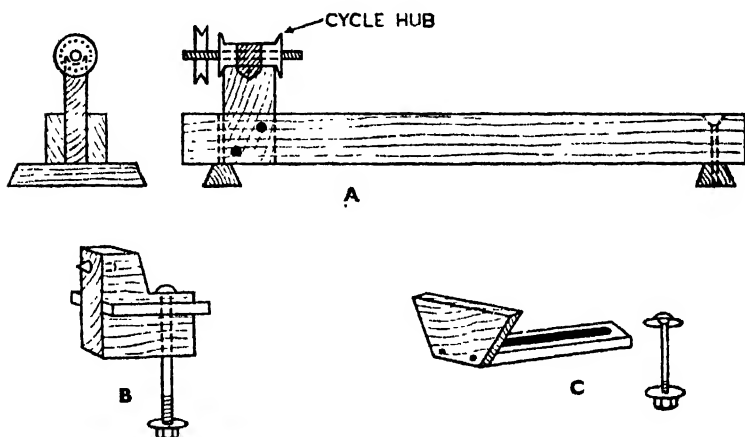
(A) Headstock and bed. (B) Tailstock. (C) Tool rest.
